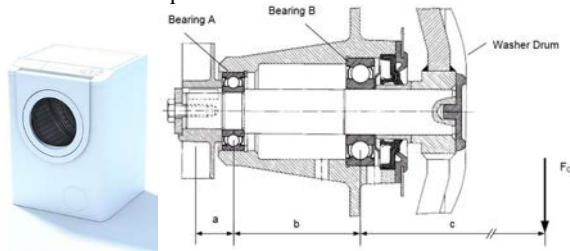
Washing Machine and tech. drawing of the drum mounted on a shaft with Bearings
